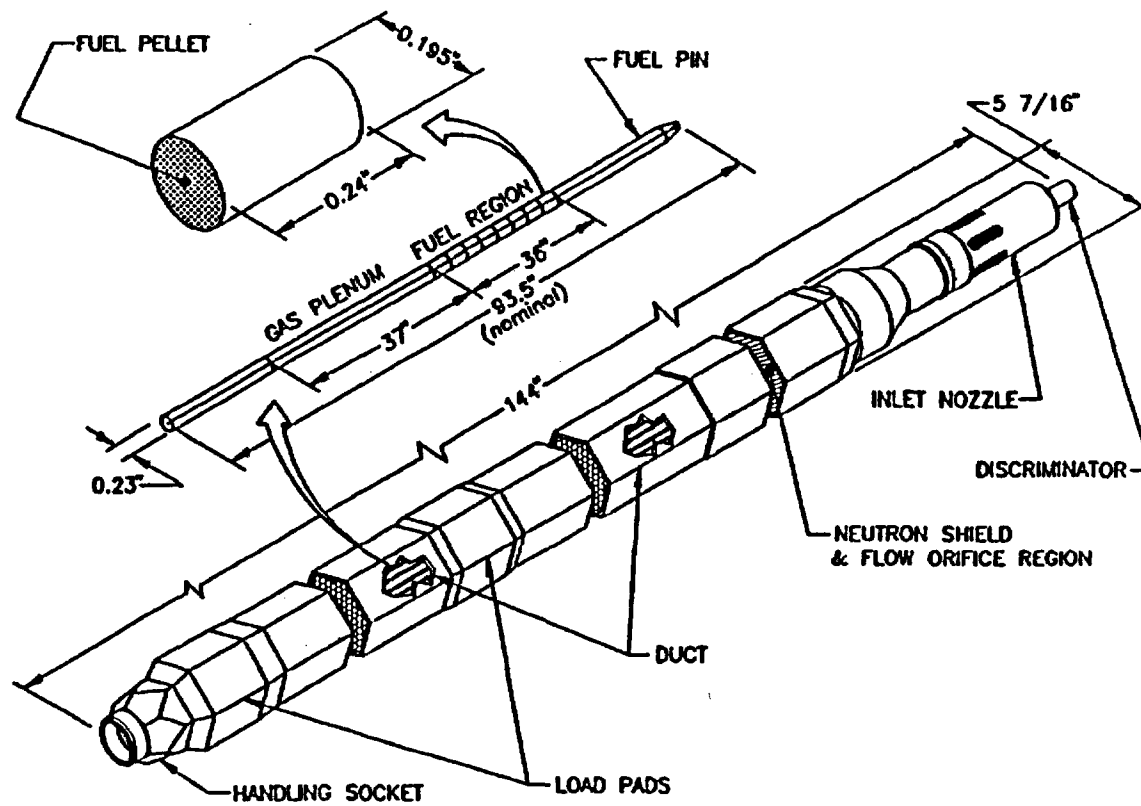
Fast Flux Test Facility standard driver fuel assembly.
